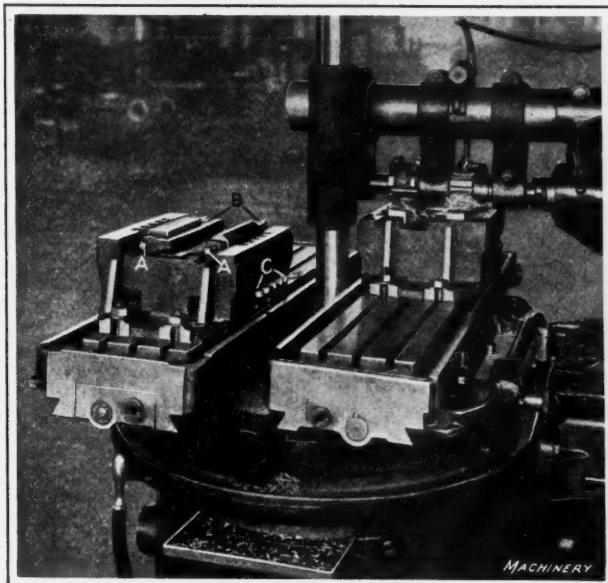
Indexing Milling Machine equipped for performing Third and Fourth Operations on Turret Revolving Pawls
